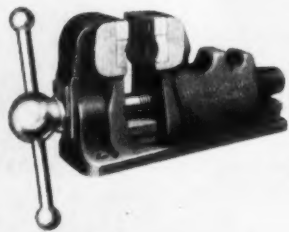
Athol Heavy-duty Steamfitter's Vise with Fixed Front Jaw
